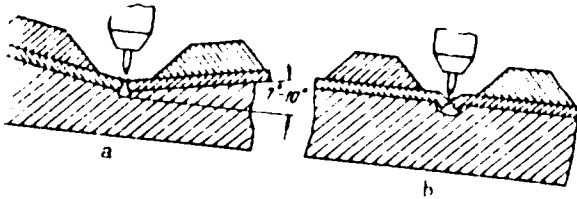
Setup for welding with controlled direction of warping by angular backing bar (a) or by flanging the sheets (b)
